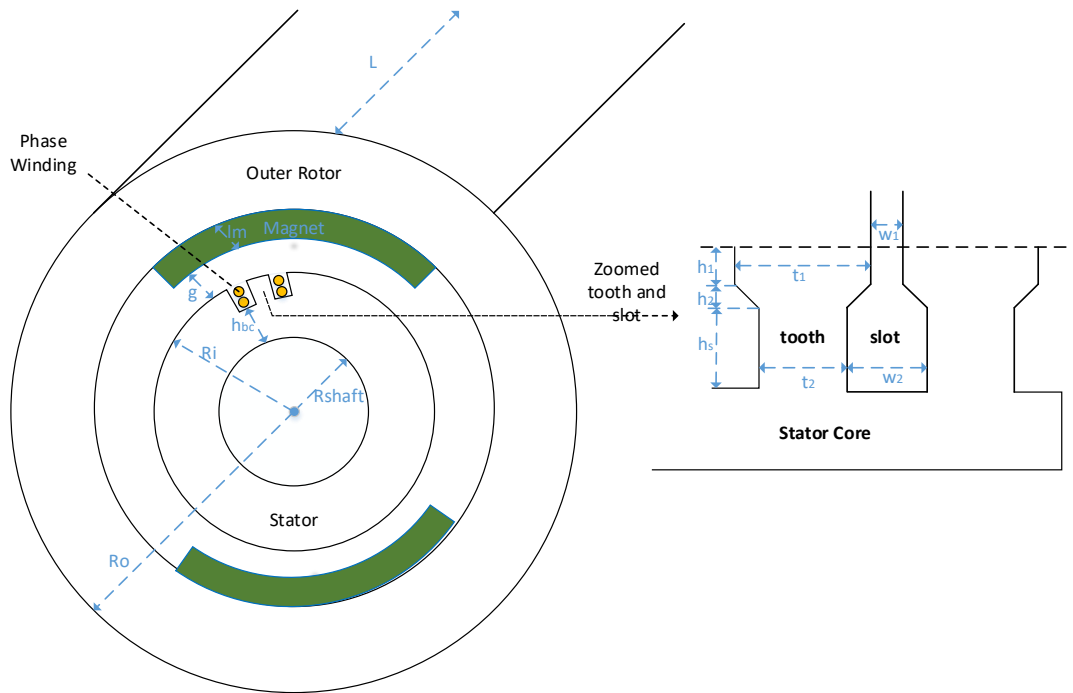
Representation of Outer Rotor BLDC Motor Dimensions
